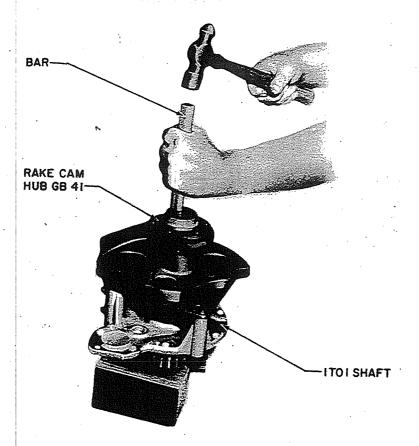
1 to 1 Shaft, Installation of Rake Cam Hub GB41
